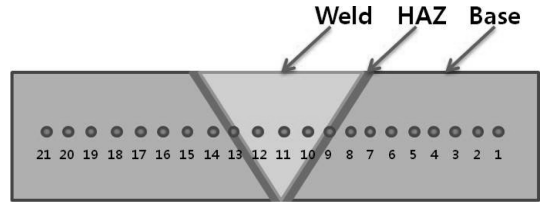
Schematic diagram of weldment specimen and locations of indentation
